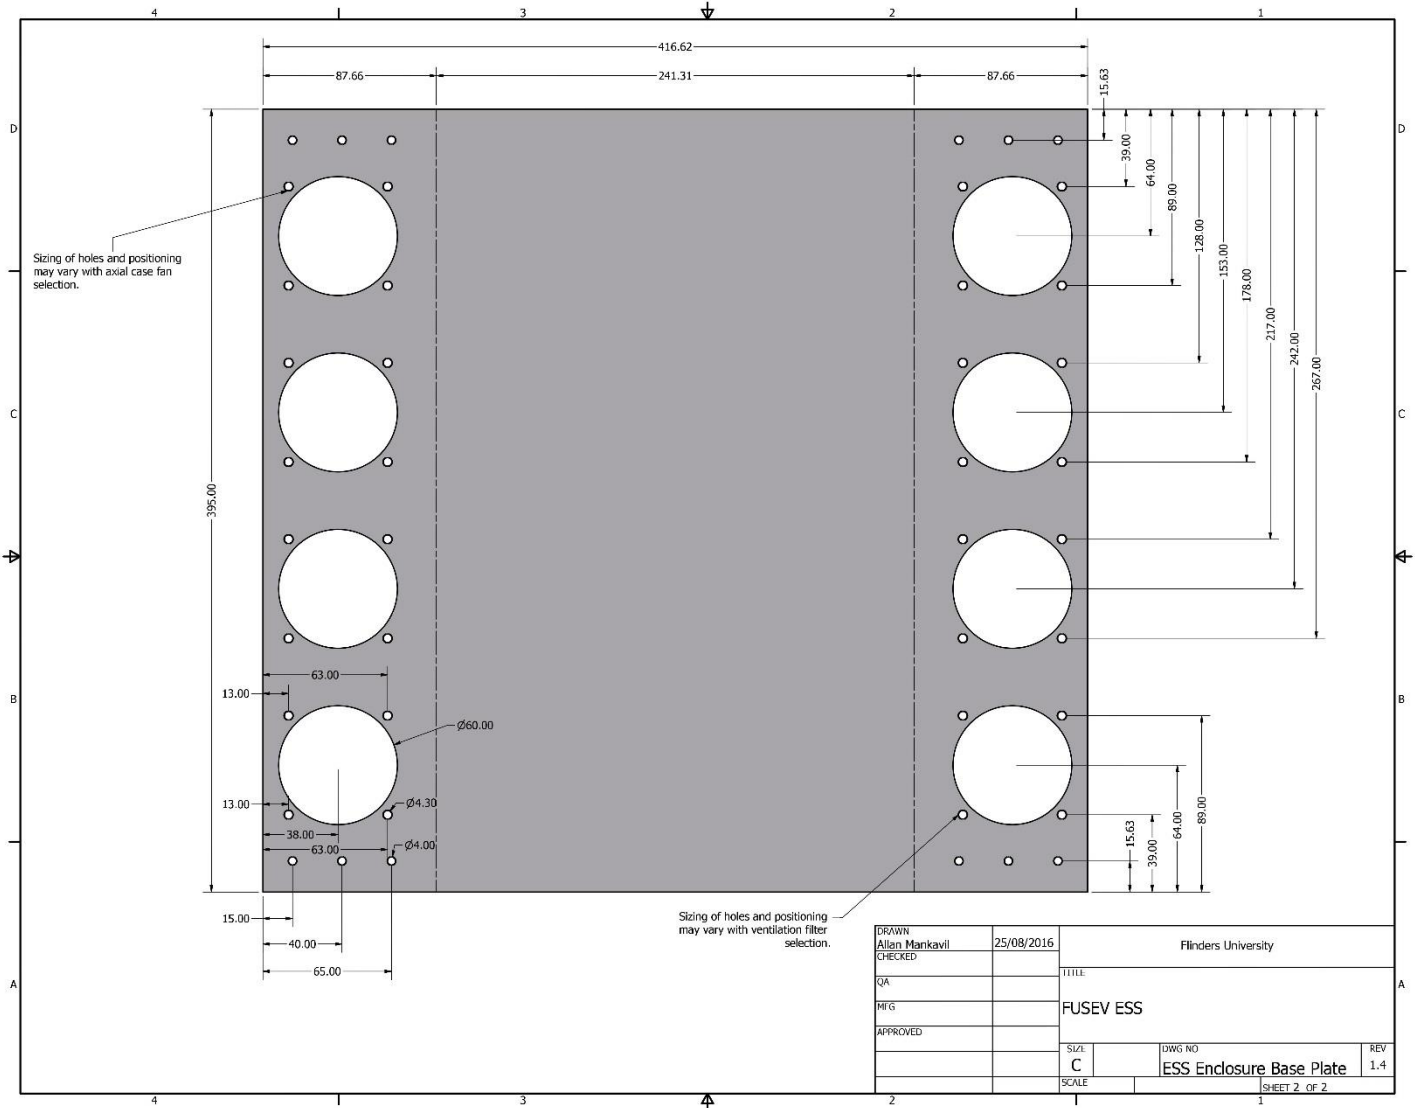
The mechanical drawing of the ESS Enclosure's unfolded Base Plate.
